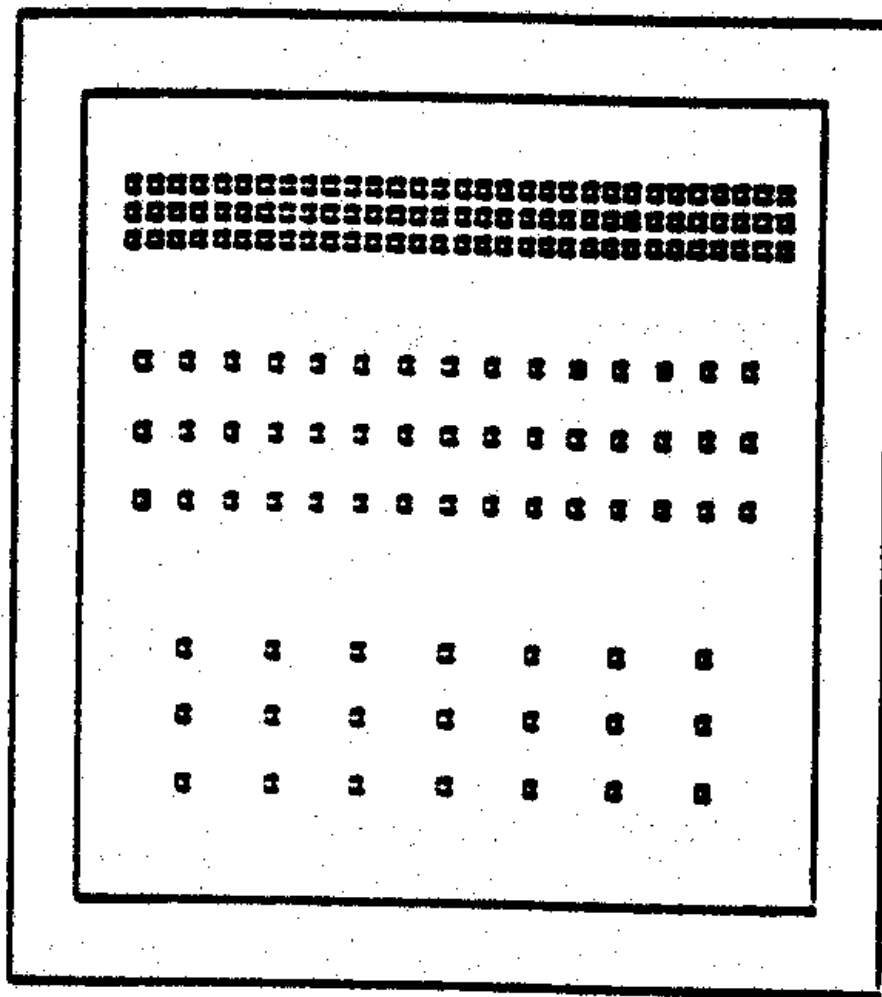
Baseline for flat spot weld panel: 2024-T3 alclad, 0.032-inch.
